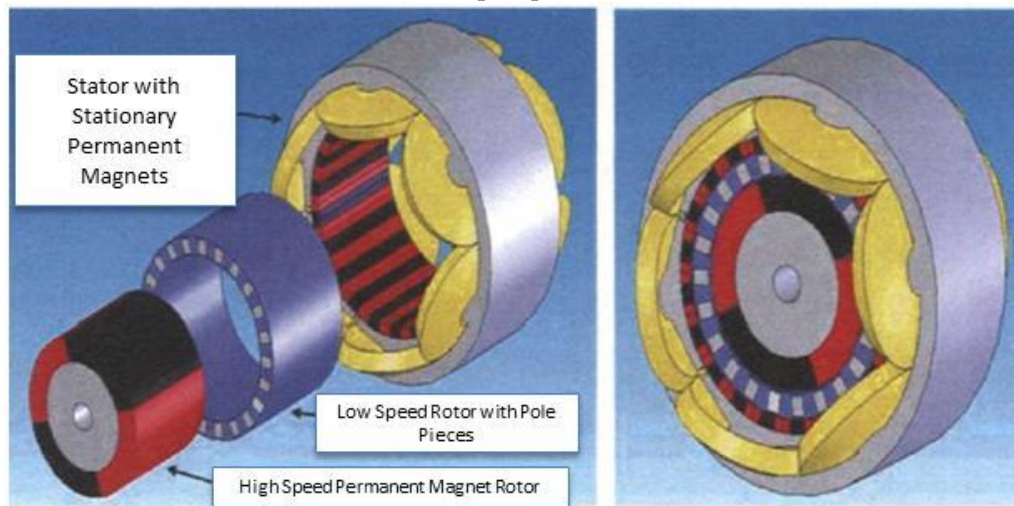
Parts of a High Torque Density PM Machine with Two Rotors [118].
